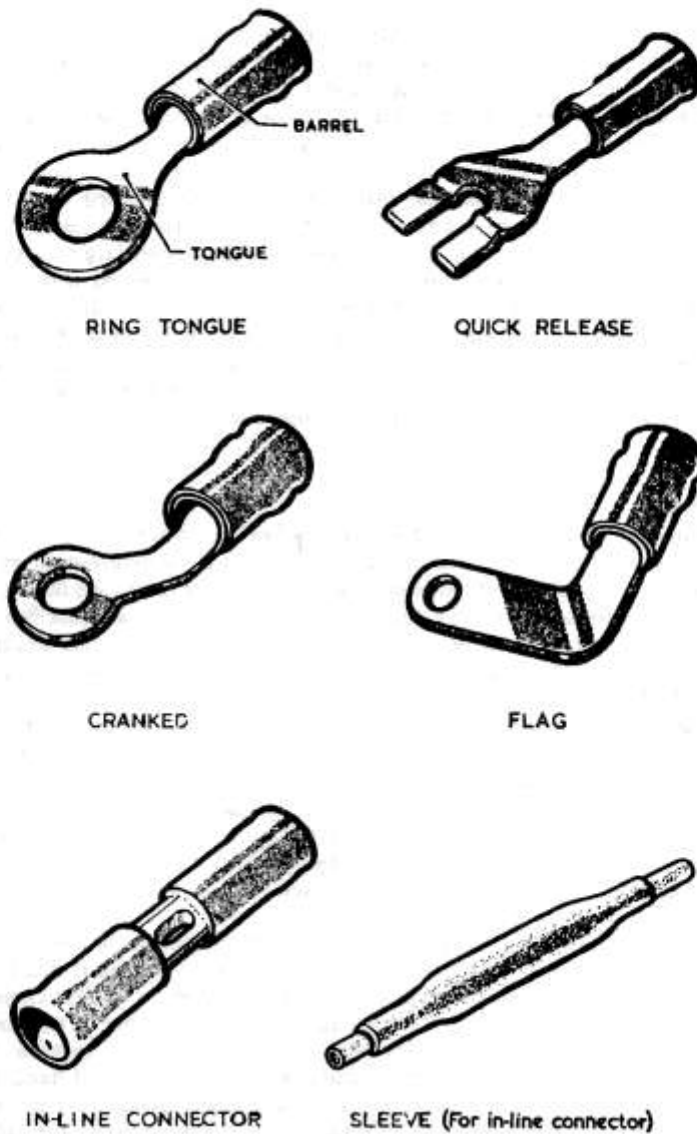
SOLDERLESS CABLE LUGS AND IN-LINE SPLICES
